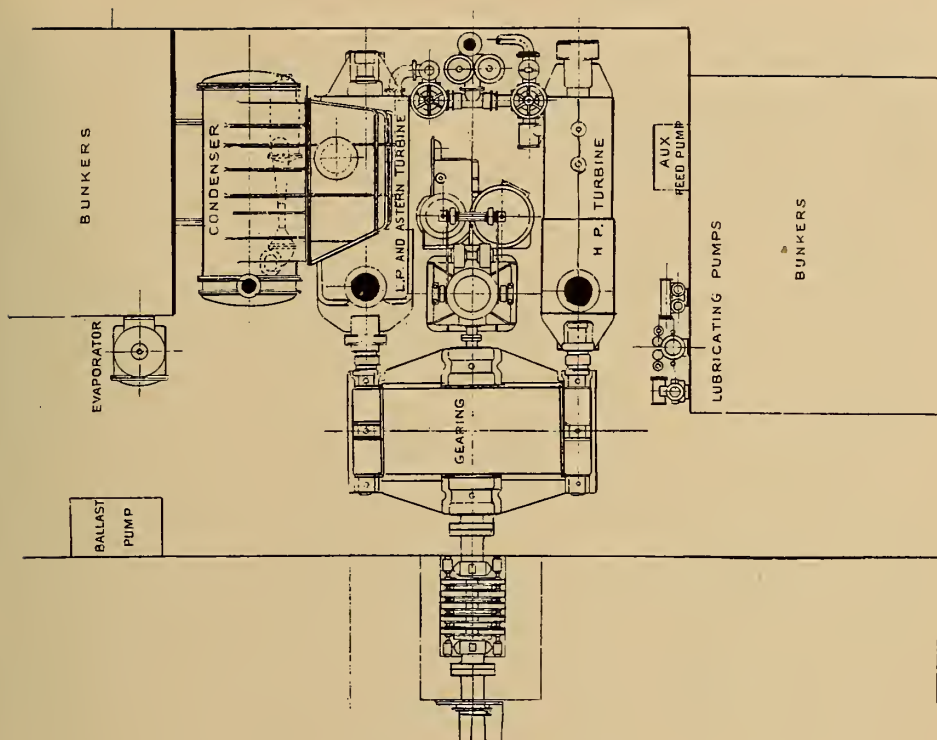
PLAN OF TURBINE ENGINES AND GEARING ON THE VESPASIAN
